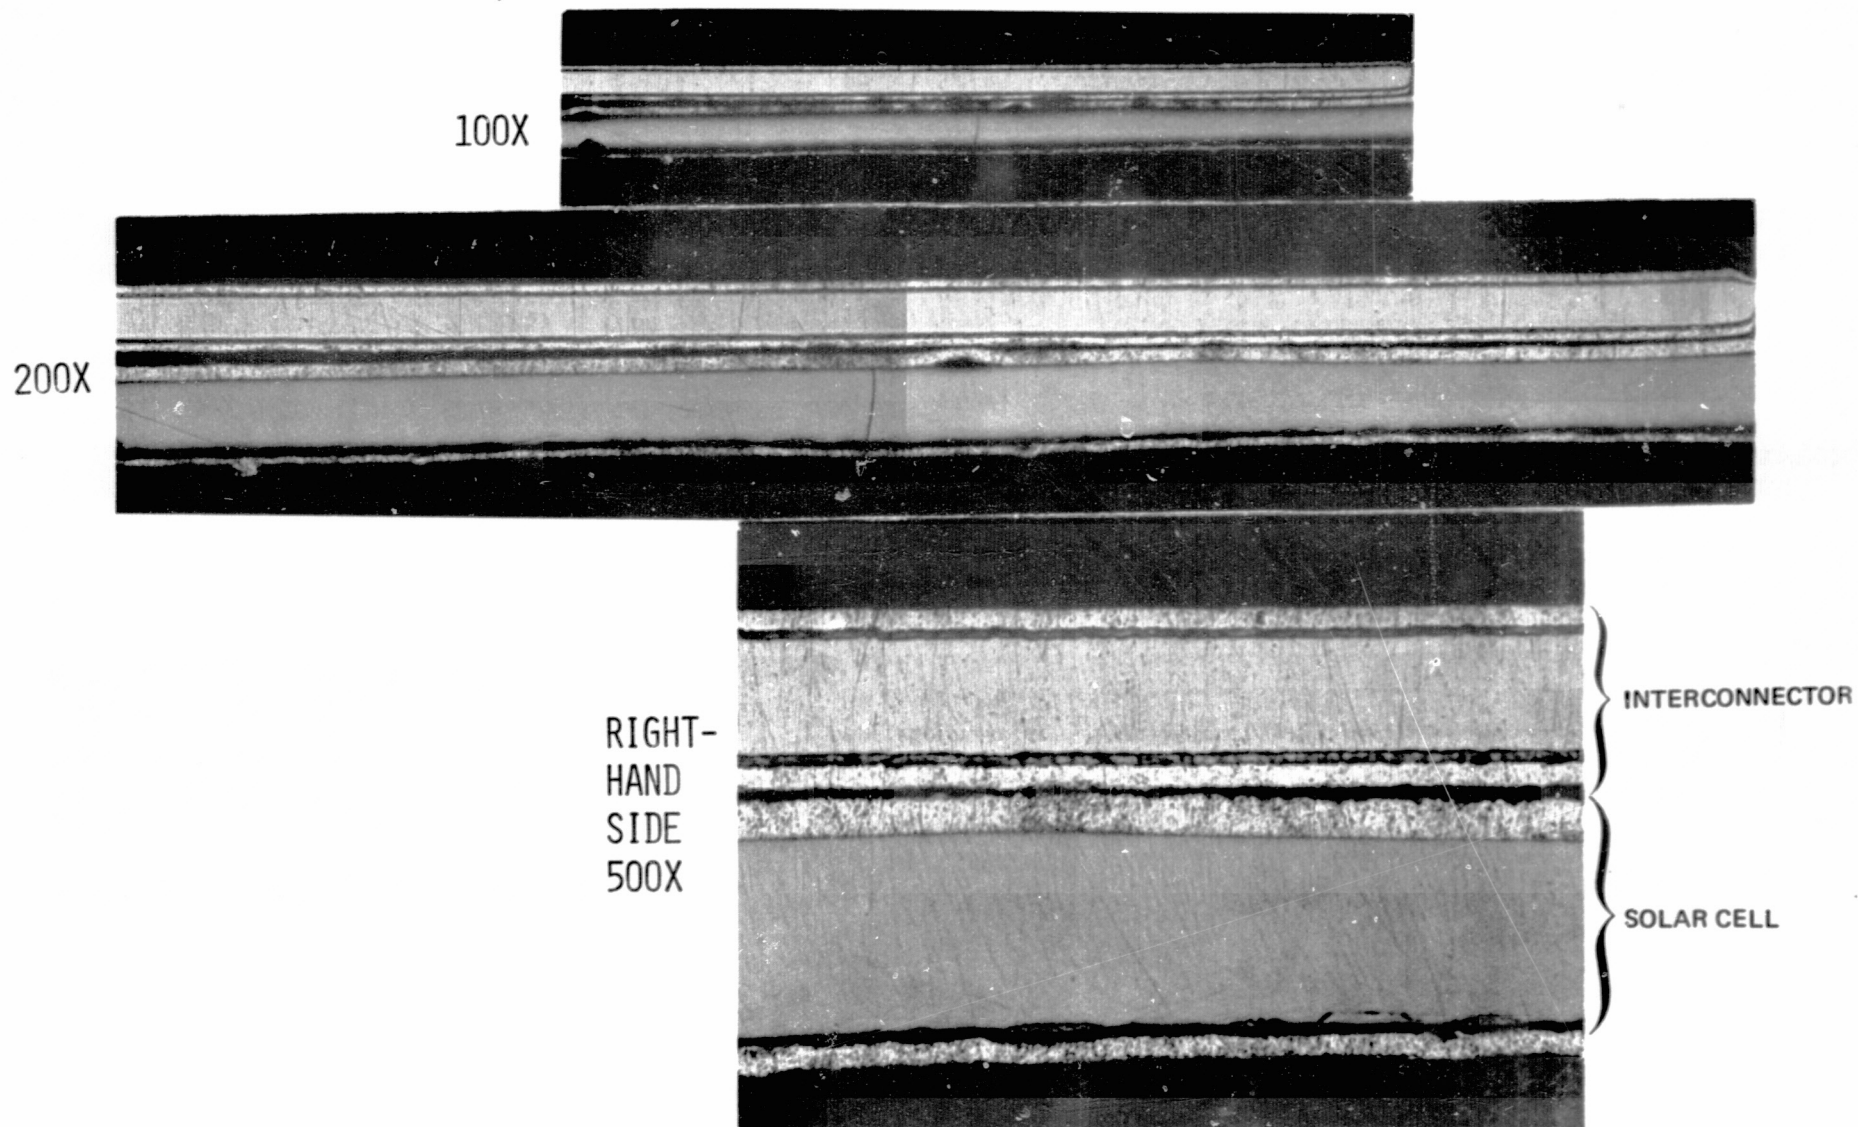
Joint No. 50, Cross Section of Cell Front Contact Weld
